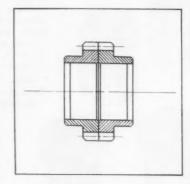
Typical gears are automatically fed to machine shown in Fig. 1, for back-to-back hobbing
